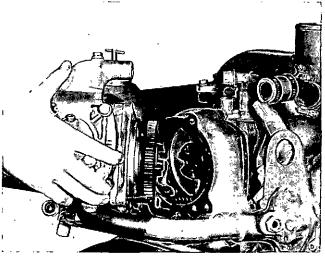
Installing air compressor V6-Val/V8-Vale
